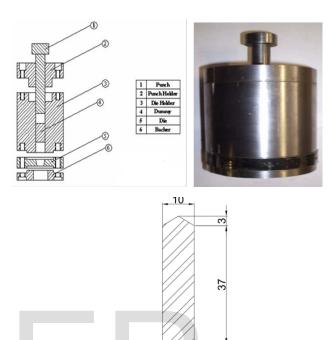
(a) Schematic drawing and photograph of the main extrusion die and (b) Mandrel
